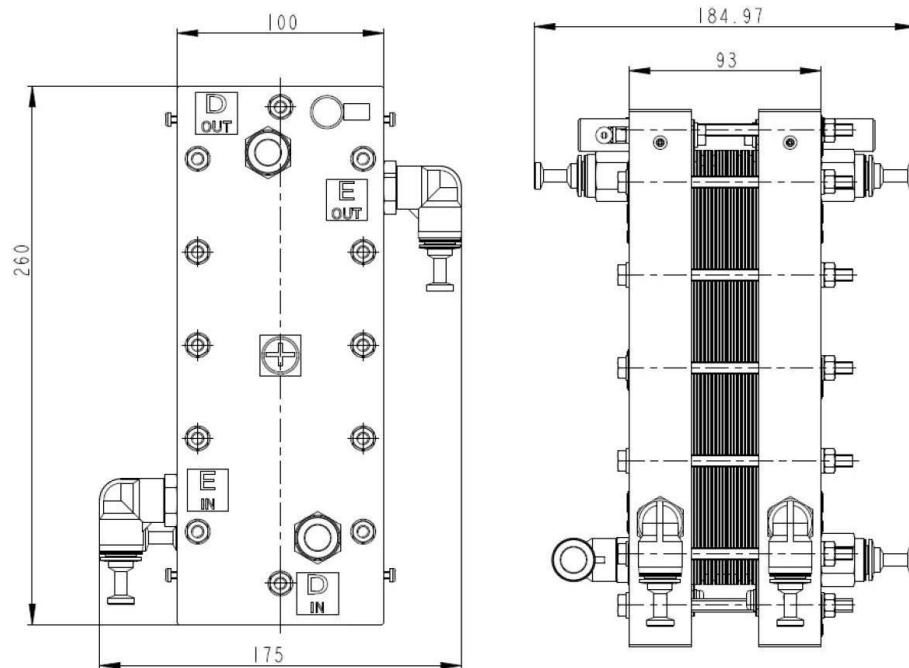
View of EDR-Z/2x10-0.8 module incl. dimensions with plugs
